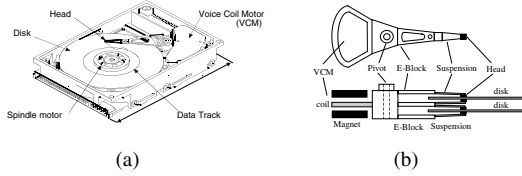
(a) Conventional disk drive configuration; (b) Conventional disk drive servo assembly
